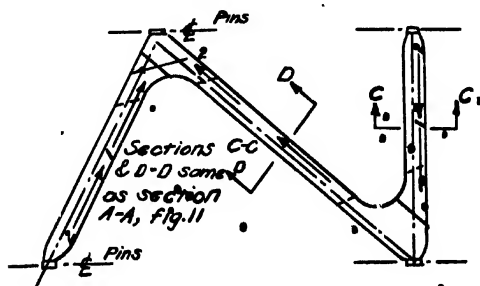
CABANE OR CENTRE SECTION STRUT.
